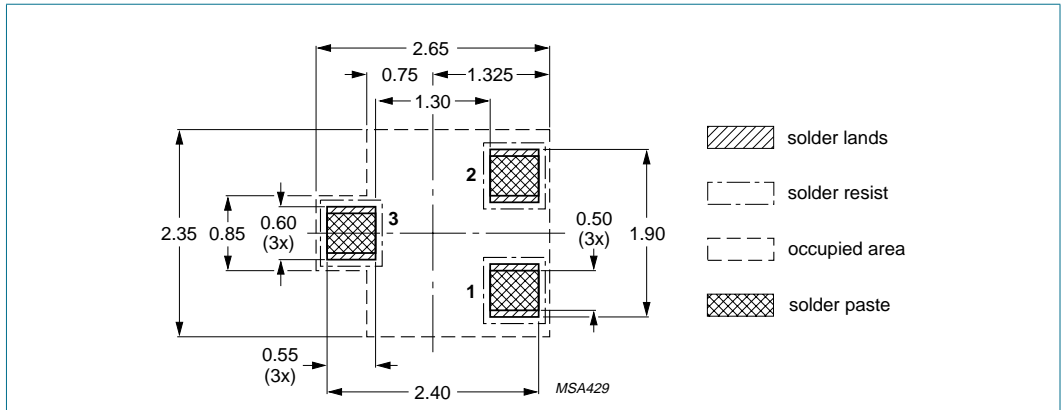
Reflow soldering footprint SOT323 (SC-70)
